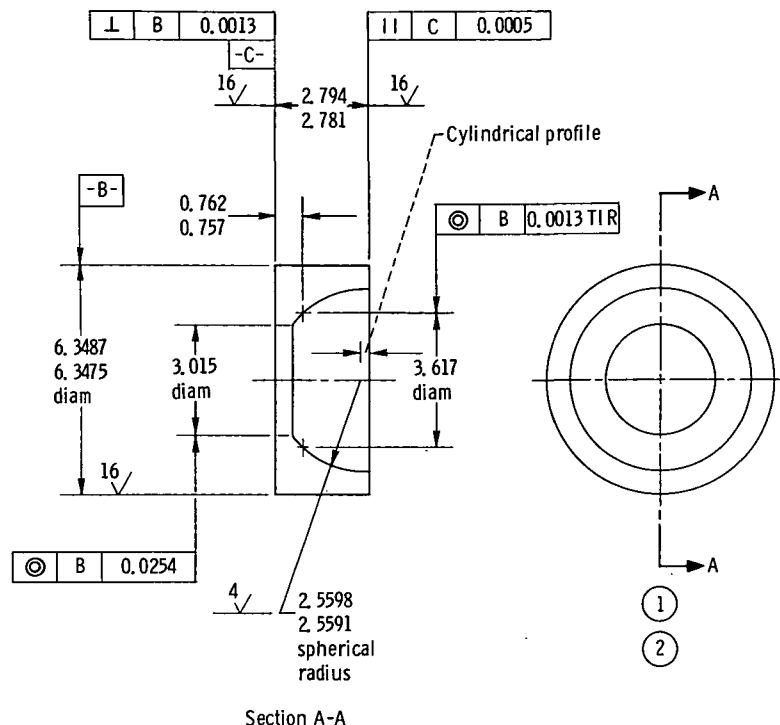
Control drum spherical bearing 128C8072. Cermet composition: set, 1 HfN-10W; set 2, HfC-8Mo02NbC. (All dimensions are in cm.)
